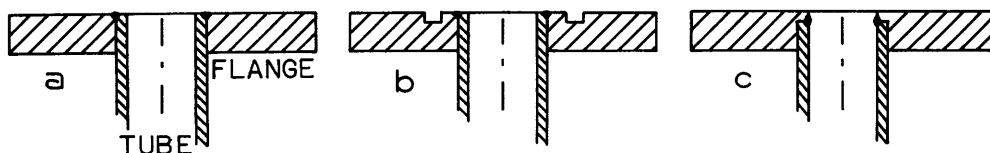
E3. Methods of welding a circular flange to a tube. (a) poor - warpage or cracking likely, (b) good - stress relief groove machined into flange, (c) good - thin ridge on inside of flange abuts tube.
